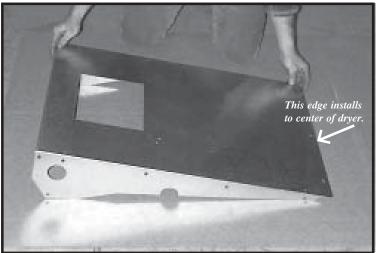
Bottom plenum divider end installs at front LH and rear RH of dryer.
